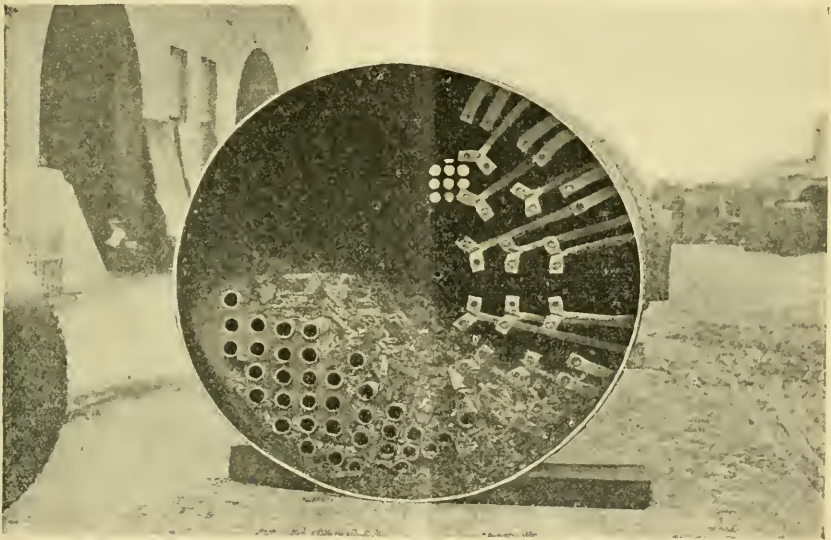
THE SAME BOILER, WITH SOME OF THE TUBES REMOVED.
